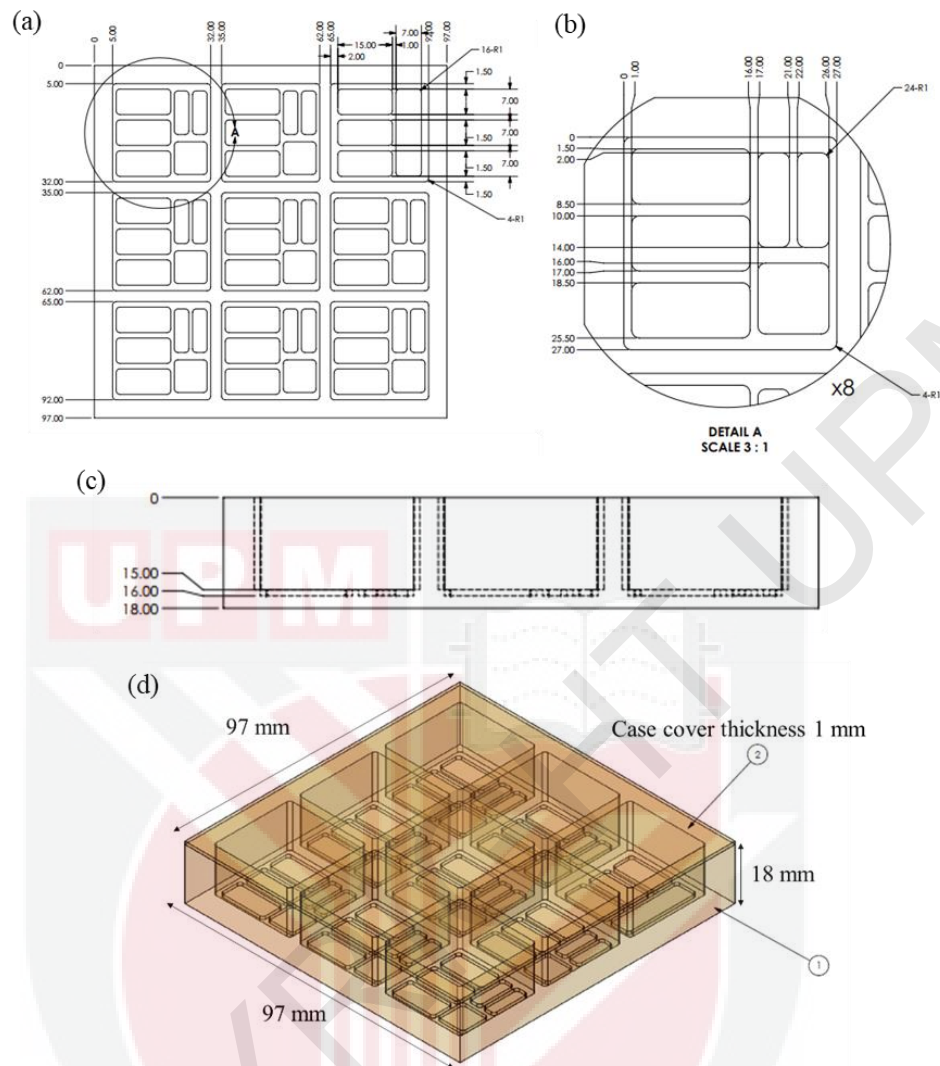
CAD drawing of the design concept of the third iteration for the main body. (a) Top view, (b) single section top view, (c) side view, (d) orthographic view
